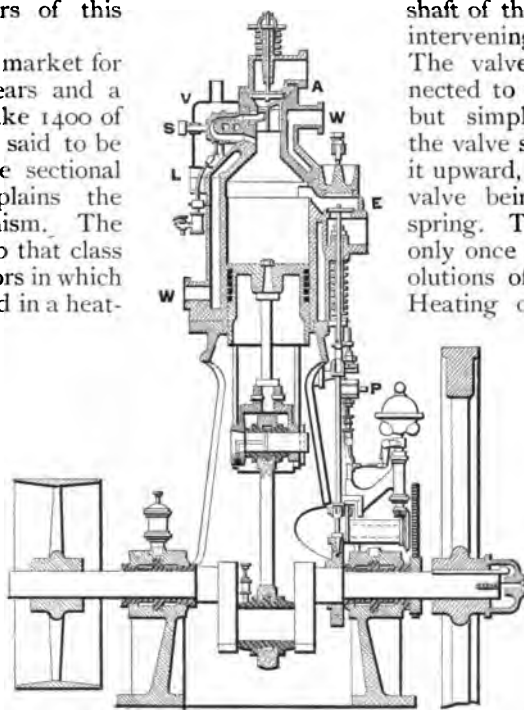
VERTICAL SECTION OF THE GROB ENGINE.
